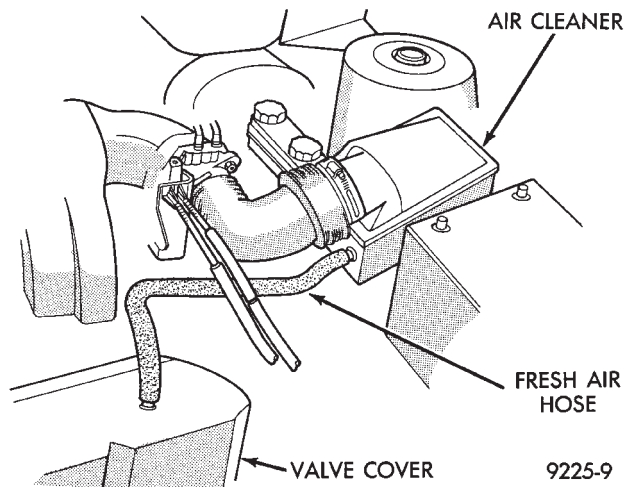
Fresh Air Hose—3.3L Engine PCV System
